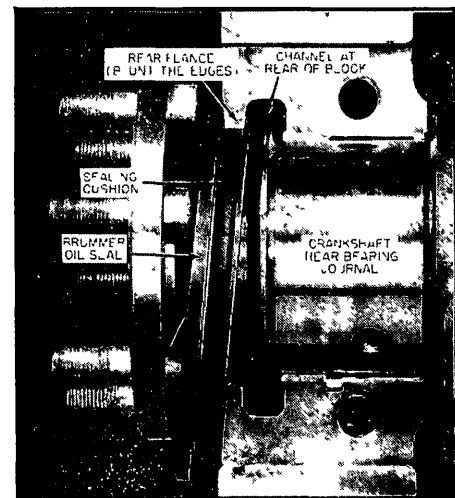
Installing crankshaft rear oil seal, 1949-52
